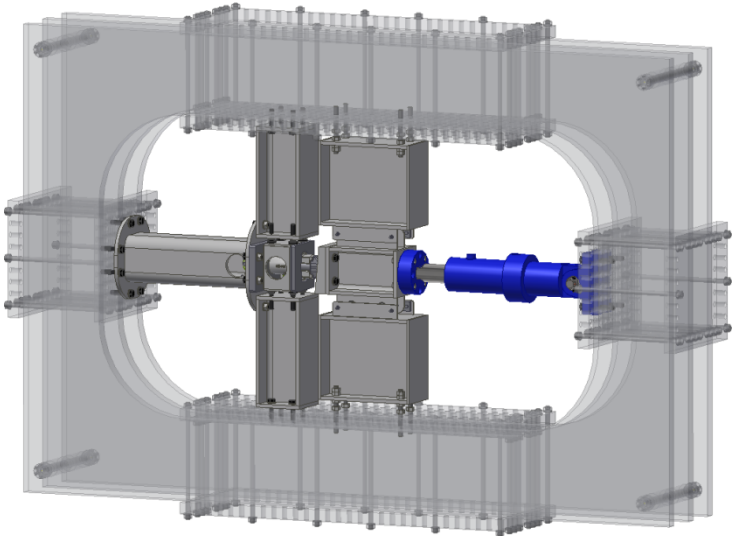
The fixation tool for the twistlock assembly mounted in the test rig
